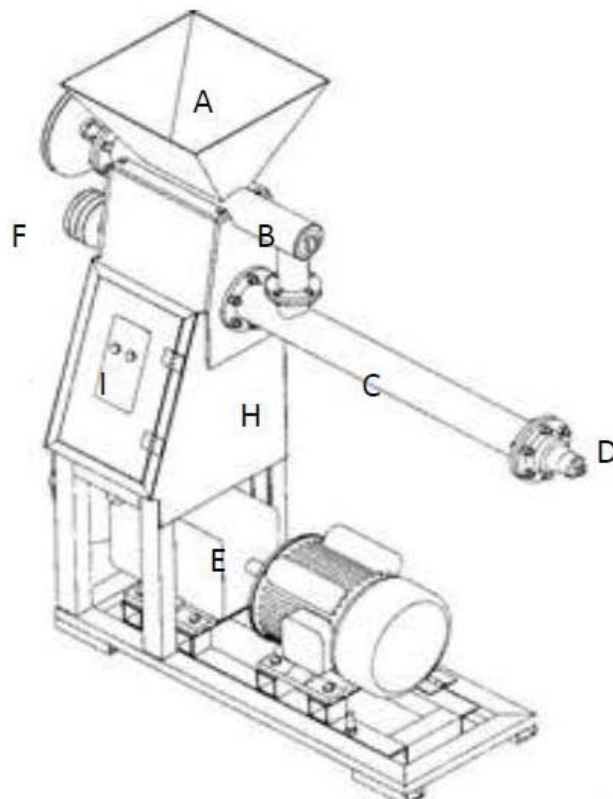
Isometric view of the extruder. A- Hopper, B- Feeding Conveyor, C- Extruder worm, D- Die Unit, E- Power train, F- Conveyor pulley, G- Extruder pulley, H- Extruder Housing, I- Control.
